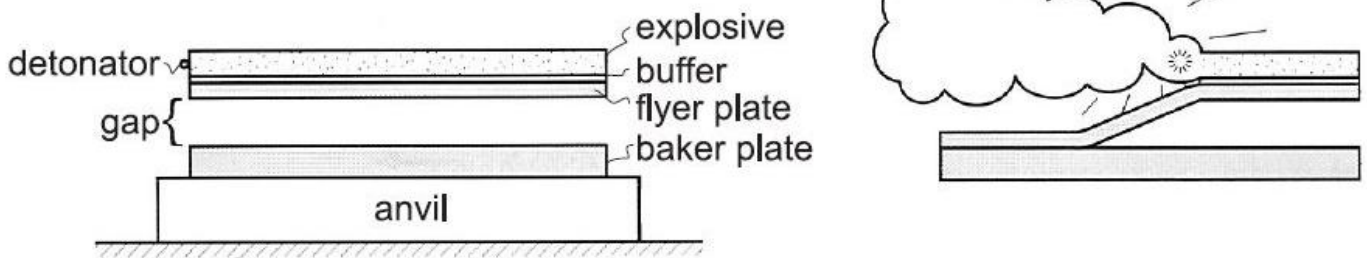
Explosive welding showing the initial setup and the process of explosive welding with the propagating shock wave.
